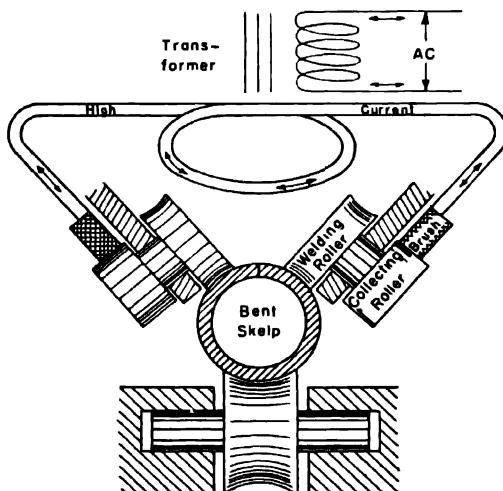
Butt-welding pipe seam by electrical resistance method.
